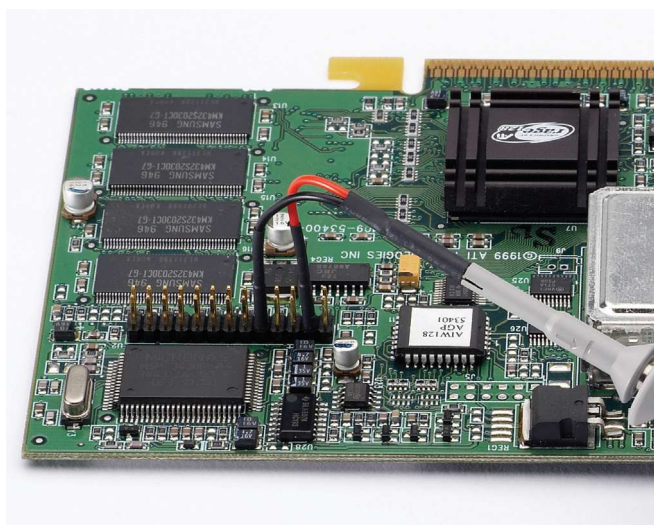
The dual lead adapter allows you to easily connect the N2870A Series probe to a popular 0.1" pin header with 0.025" square pins. This dual lead adapter has no shorting hazards since all external metal surfaces are insulated.
